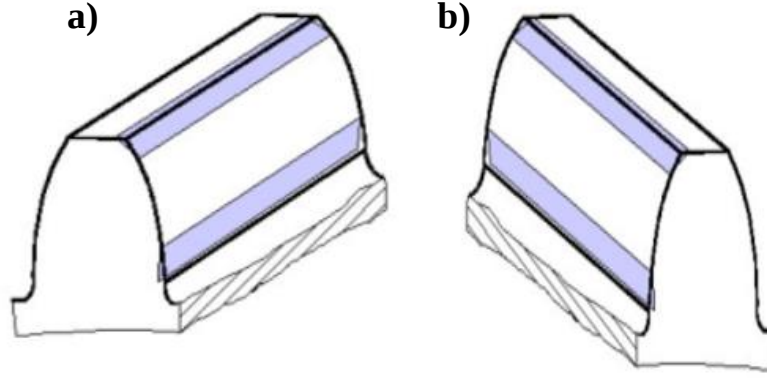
Gear Slice Method for Gear Pair: a) Gear; b) Pinion (from KISSsoft).
